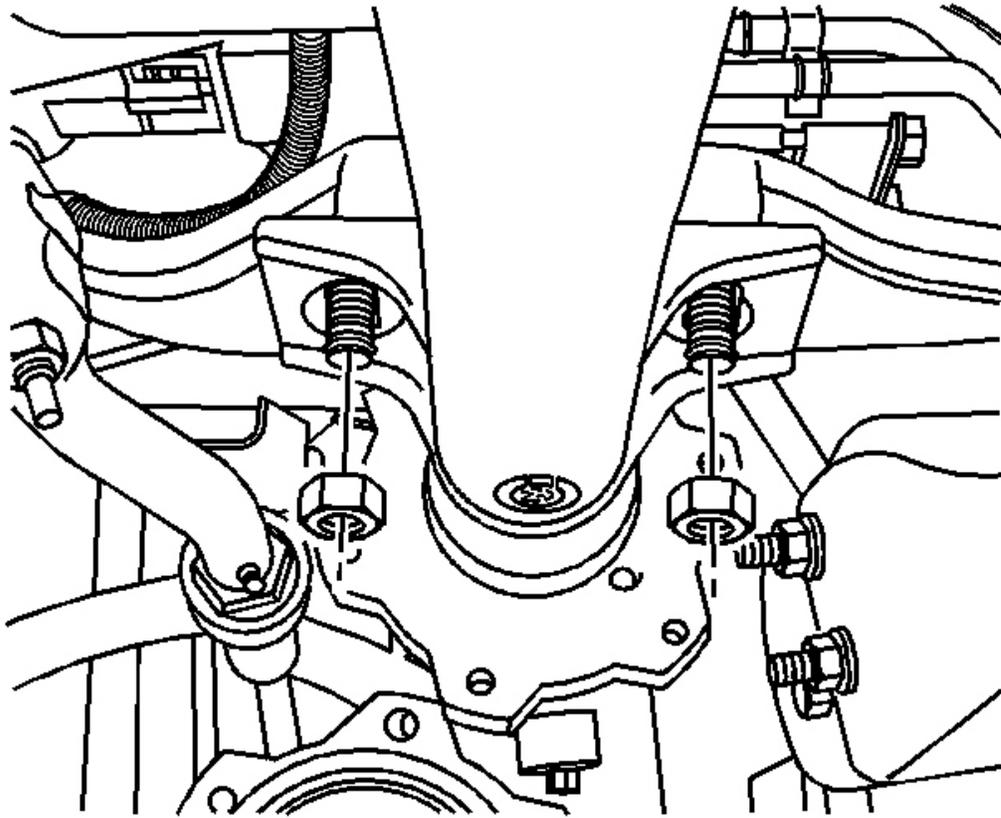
Front Drive Inner Axle Shaft Housing Nuts
